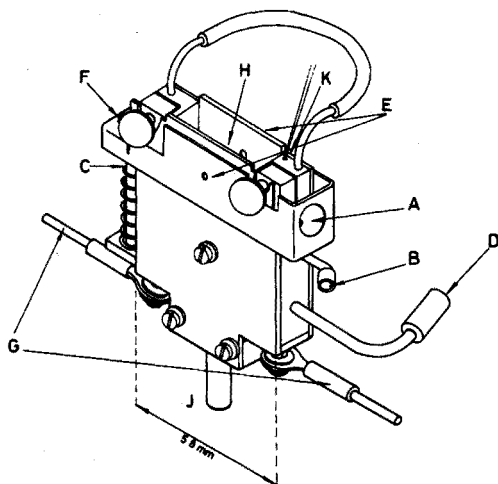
Graphite rod head: (A) access to graphite rod; (B) air cooling in; (C) air cooling out; (D) purge gas in; (E) aperture; (F) aperture height adjusting screw; (G) transformer connections; (H) graphite rod; (J) mounting pillar; (K) thermistor.
